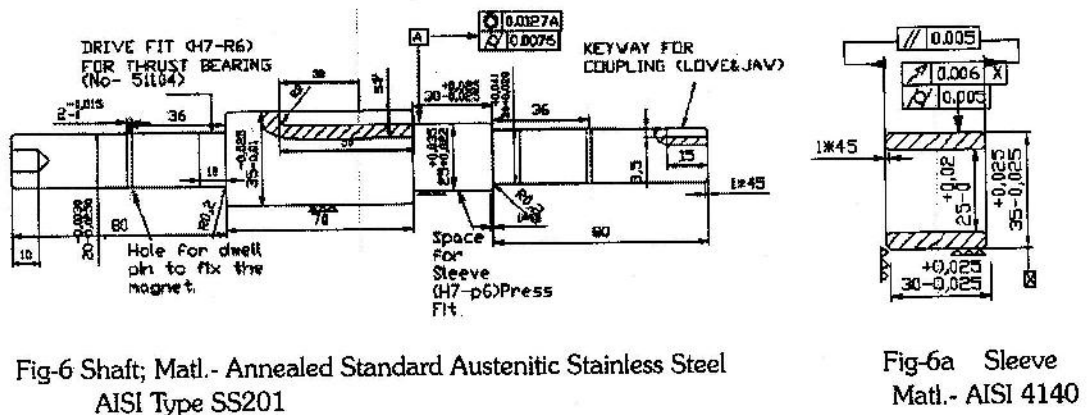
Shaft; Matl.- Annealed Standard Austenitic Stainless Steel AISI Type SS201
